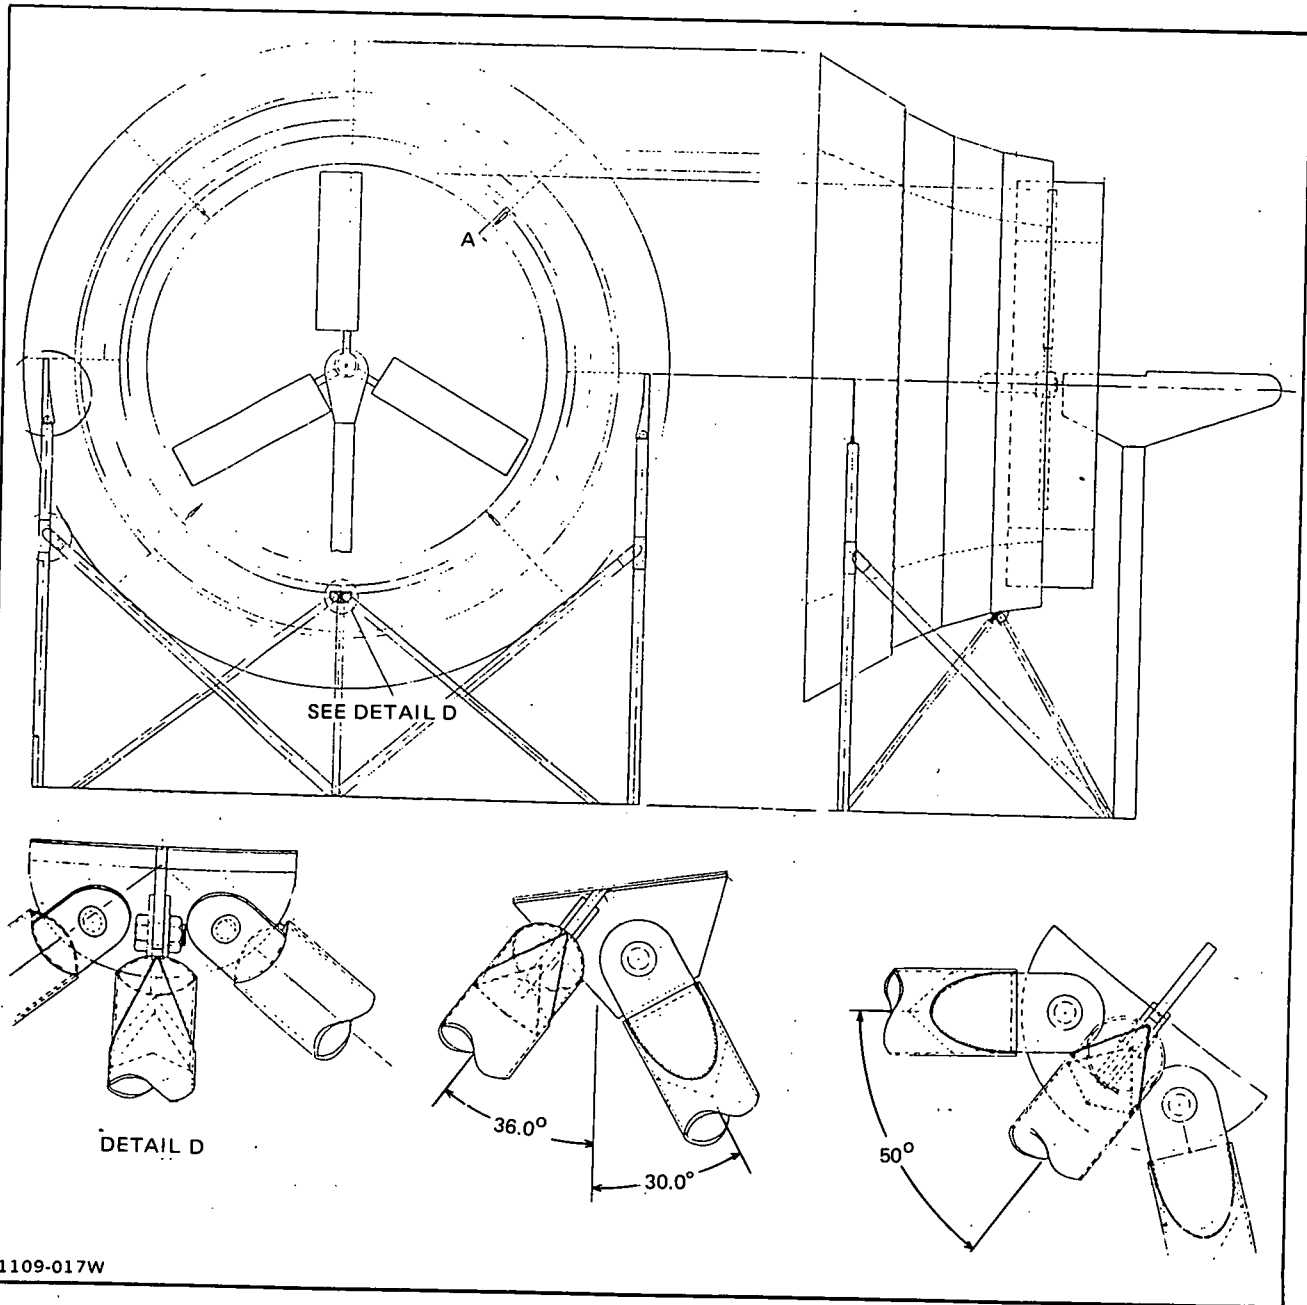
Baseline Design DAWT Thick Plate, Segmented Pattern, Cut from Rectangular Sheets, Bolted Support Structure
